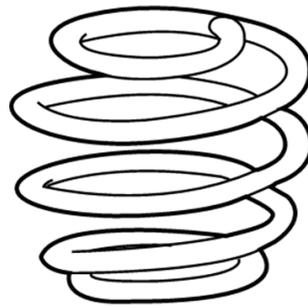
typical front coil spring from the Honda Civic suspension assembly. [1]
